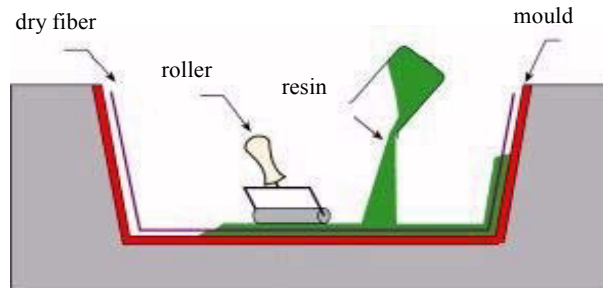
Composite Manufacturing Technique - Wet Hand Lay Up
